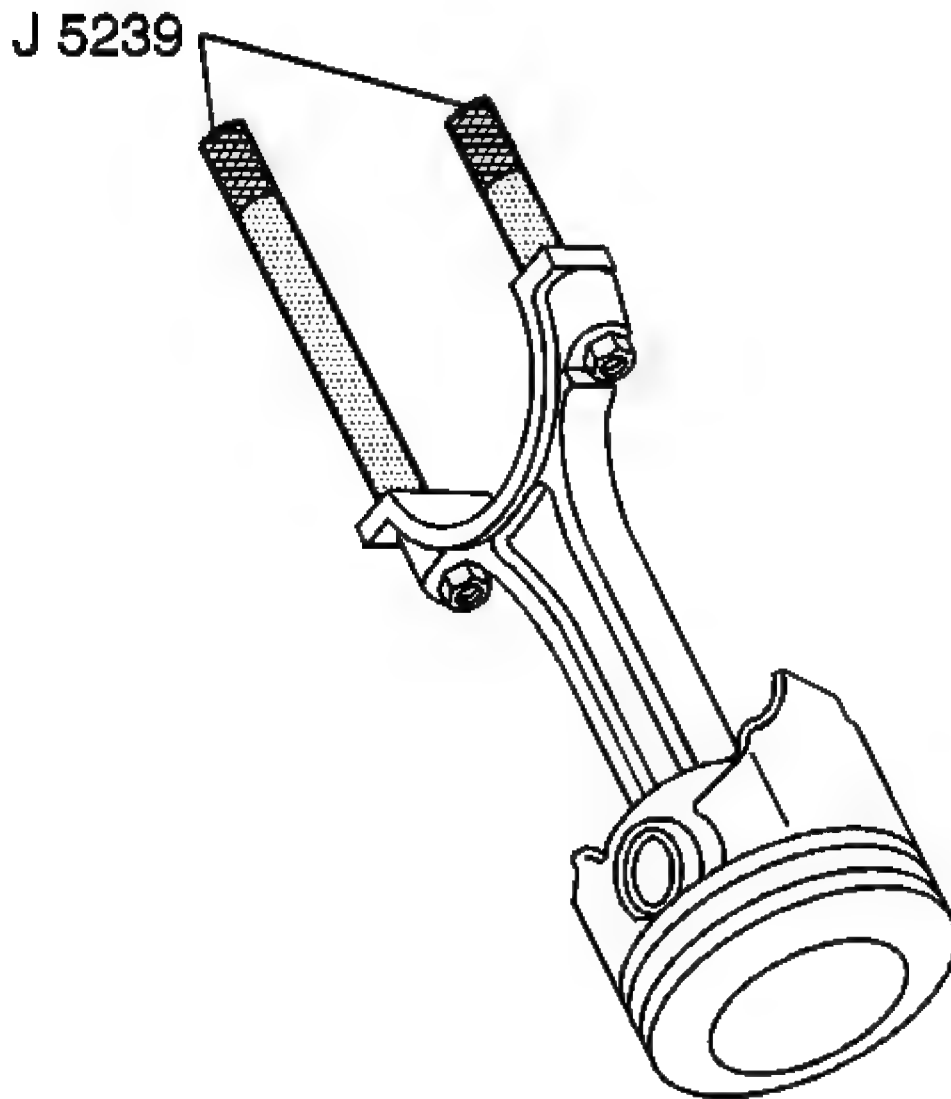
Installing J 5239 Onto Connecting Rod Bolts
